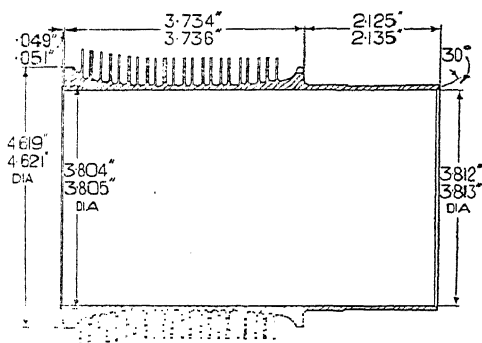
Section through cylinder barrel of Napier "Dagger" engine.
